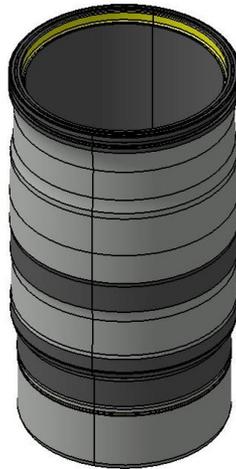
Illustration of outer- (marked with dark) and inner (yellow) turned surfaces of a cylinder liner.
